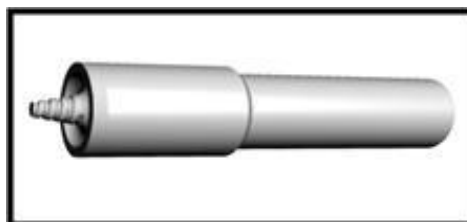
, A Basic Friction Stir Welding Tool.
